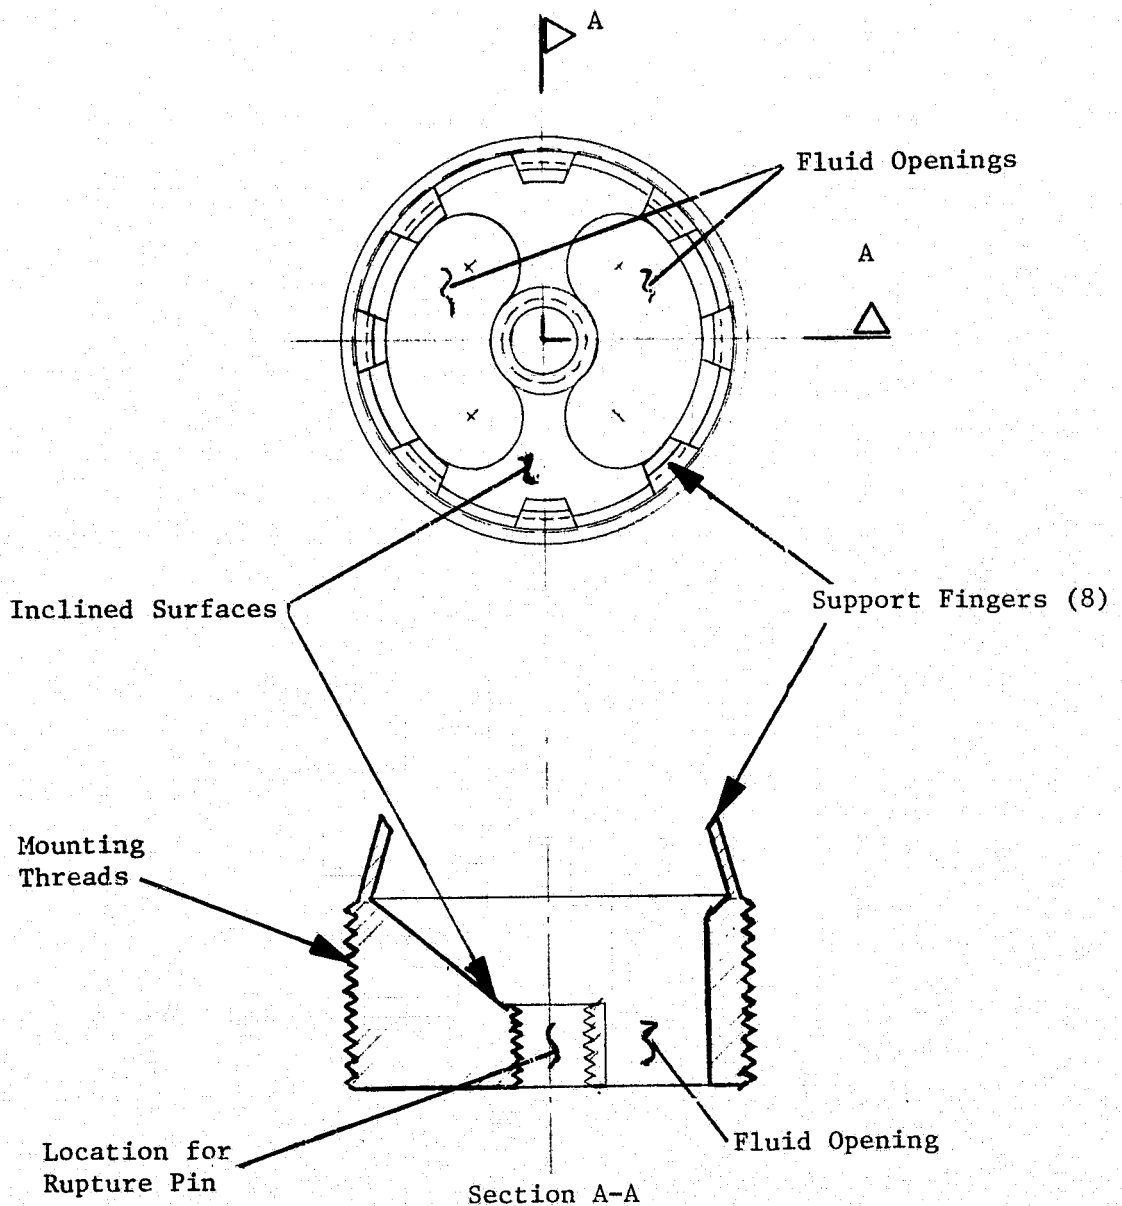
Capsule Holder Details - Nutrient/Reagent Injector
